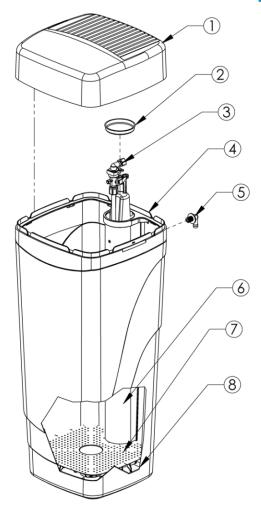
Standard Brine Tank Assembly (T-48 and T-48CX)
